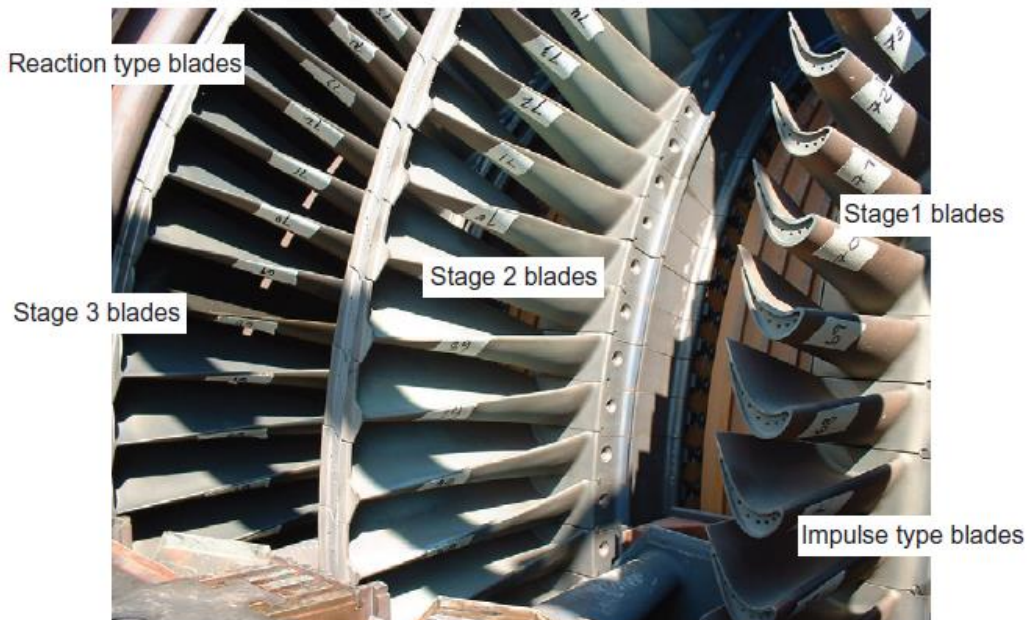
Cooling blades in a turbine section of a frame-type gas turbine [10]
